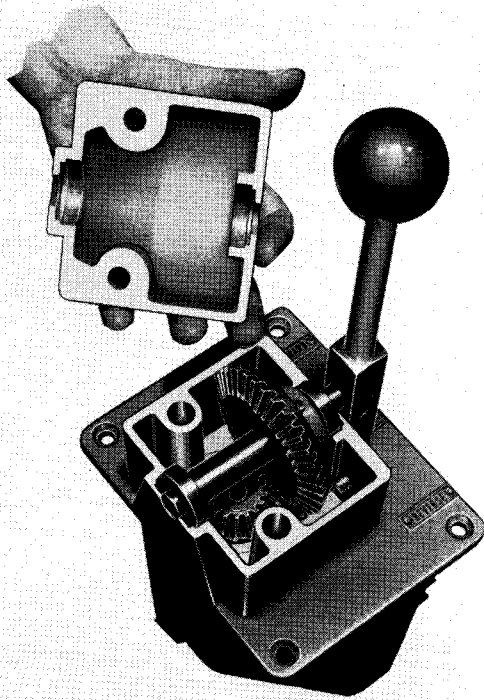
Type DM Master Switch, Top Housing Removed to Show Gearing
